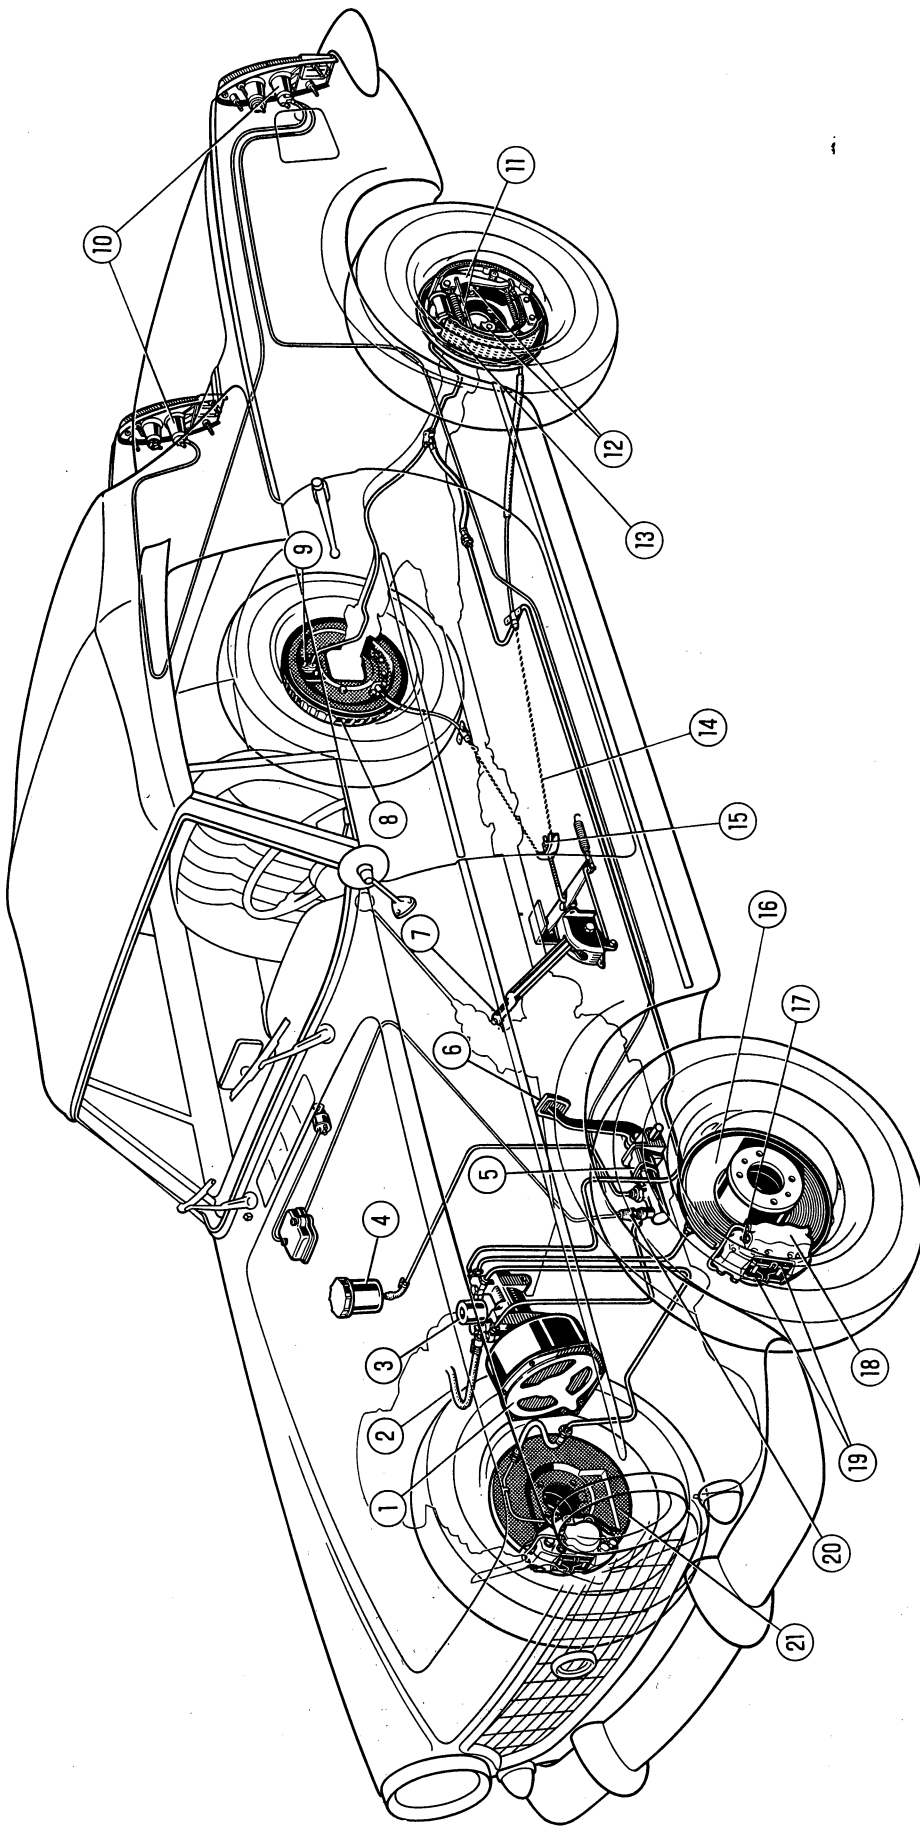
Service and parking brake system diagram - 1500 Cabriolet.
